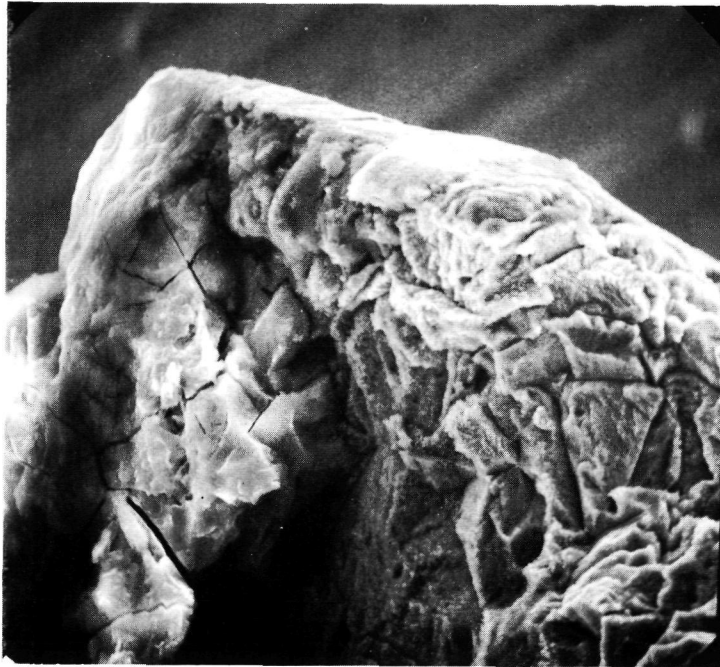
PRIMARY FRACTURE SURFACE OF THE STRESS CORROSION CRACKED 310 STAINLESS STEEL, 1000X.
